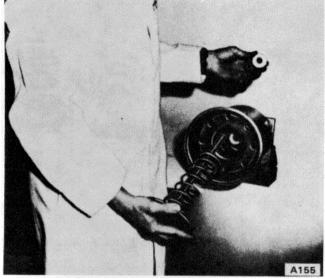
D-13. Installing Push Rod ply pressure to the top of the pressure plate to squeeze the diaphragm in place. Install the clamp band on the pressure plate and cylinder. Be sure the service air inlet is in the position it was before the unit was disassembled. Tighten the clamp band bolts to 100 to 150 in-lbs. (1.15-1.73 kg-m).
